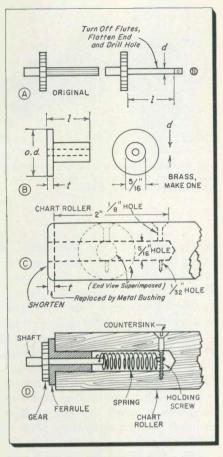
(A)-Remove fluted shaft gear from one chart roller, turn off flutes on shaft, flatten shaft end with file and drill hole. (B)-Turn brass bushing to fit gear shaft and hole in end of chart roll. (C)-Cut off end of chart roll equal to thickness "t" of bushing flange. Enlarge hole in chart roll end to 5/16" to a 2" depth. (D)-Mount the assembly and tighten spring holding screw.
